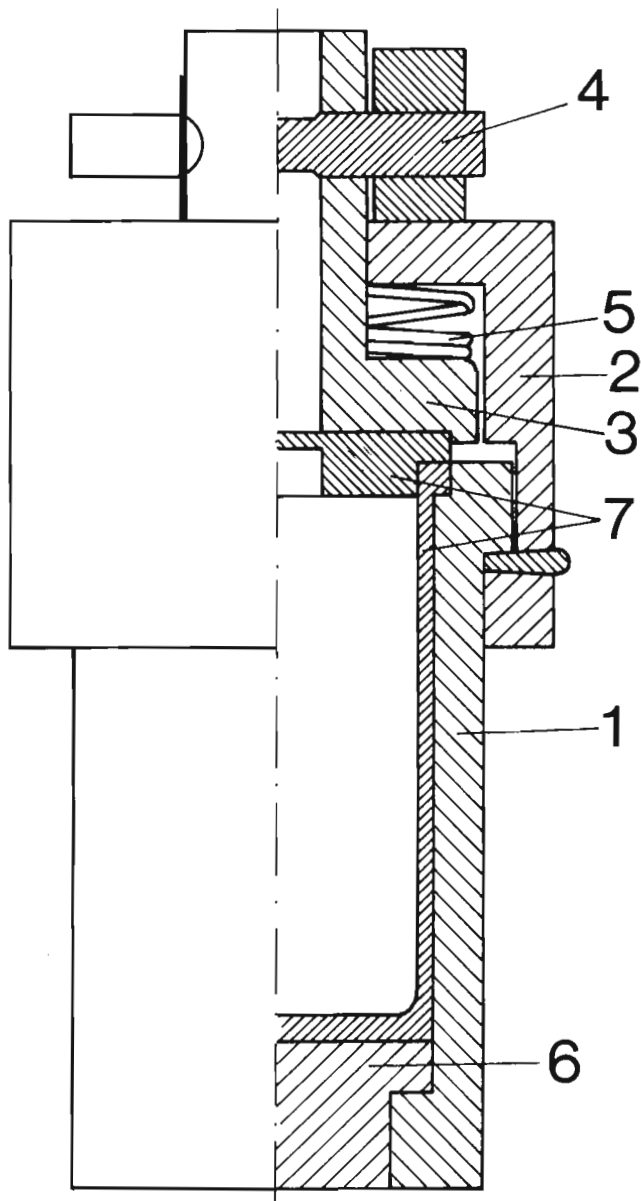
Pressure digestion system IV (Berghof, Eningen). General and schematic view: 1-pressure vessel; 2-bayonett quick lock device; 3-pressure valve with outlet; 4-tension bolt; 5-springs; 6-base plate; 7-PTFE liner with cap (100 mL).
